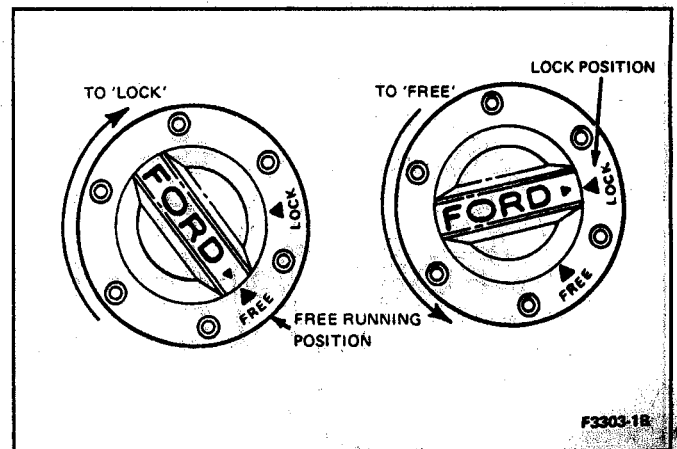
Four Wheel Drive Wheel Hubs—Manual Locking Hubs
